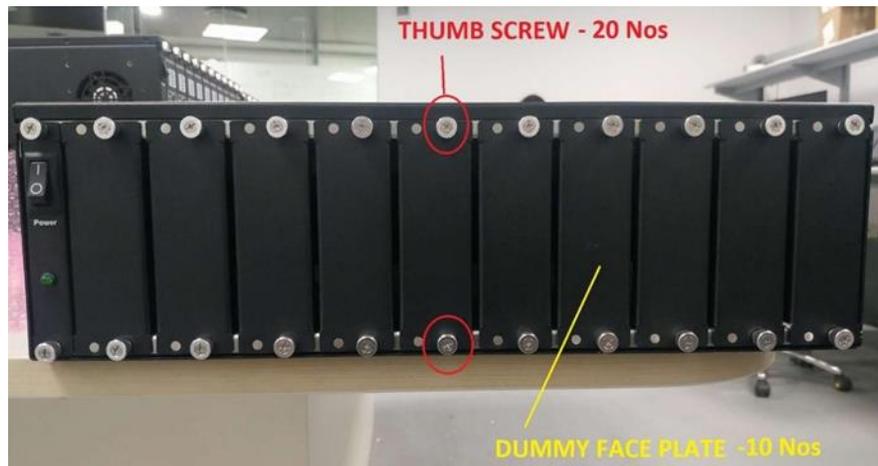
Unscrew GRL-V-UP Tester Dummy Face Plate
